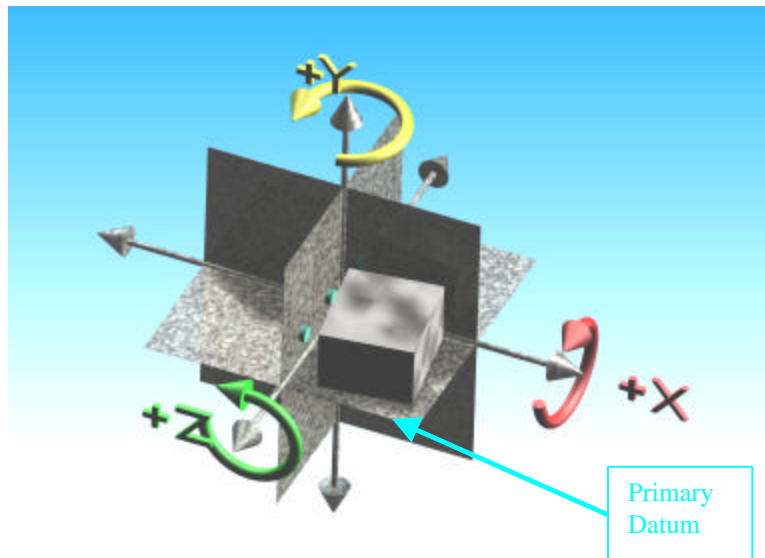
Illustration of coordinate system showing part with contact on primary datum.
